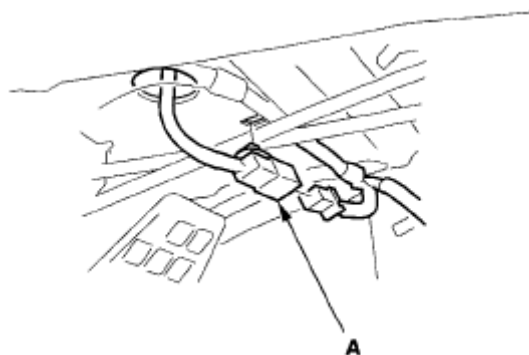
Disconnecting And Detaching High Mount Brake Light Connector
